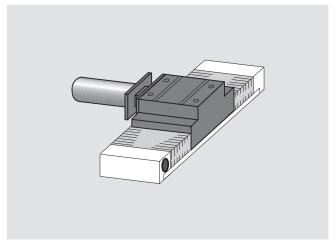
Screw drive with lateral motor mount at the bottom (Mounting condition 07)
